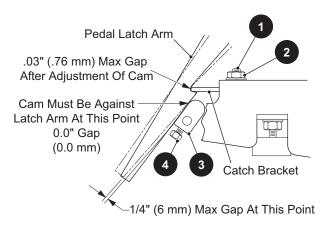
Catch Bracket and Latch Arm Parking Brake Pedal, Removal and Installation
